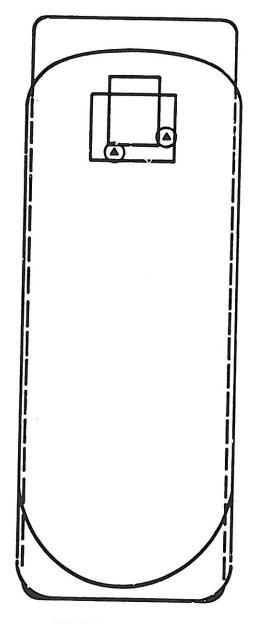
Windshield Wiper Motor Locations - Rear Engine Passenger Cars.
